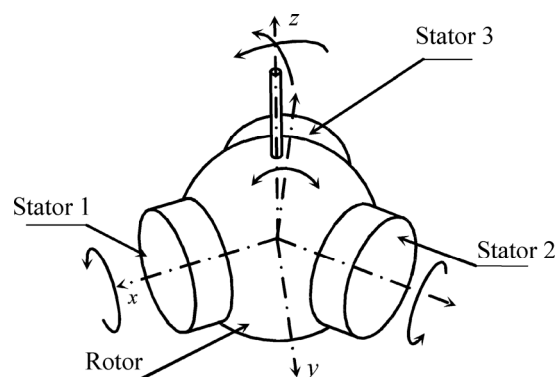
Sketch of structure and working principle of 2-DOF spherical ultrasonic motor
